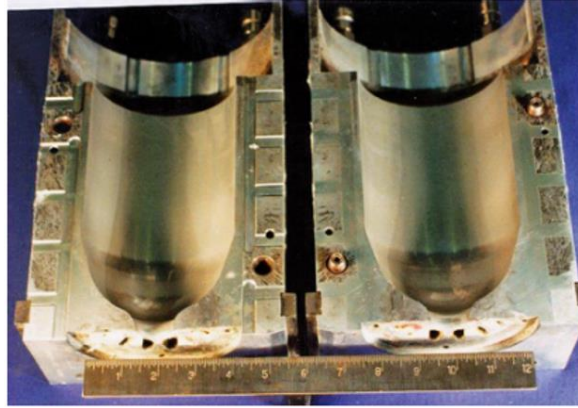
Aluminum alloy mold used to produce two-liter plastic bottles (9)
